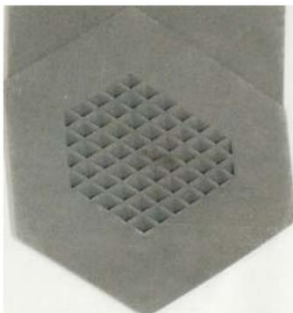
SLM as-printed grille to be polished with abrasive flow machining (Xuanping Wang et al., n.d.).
